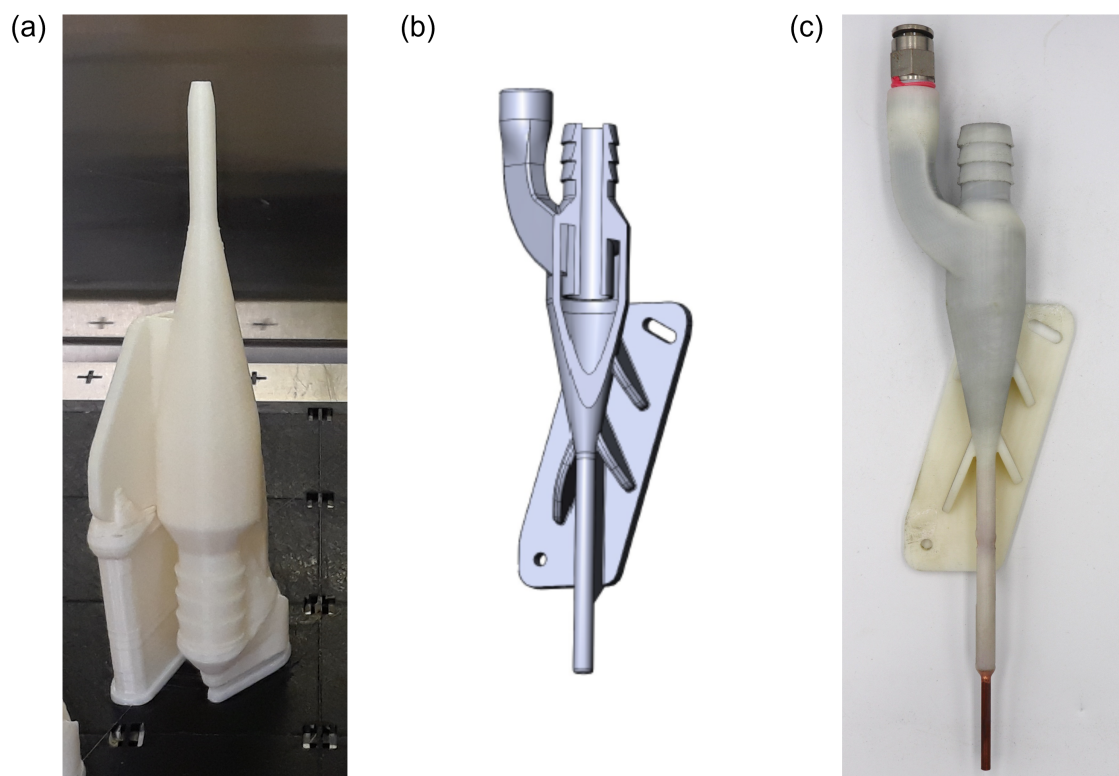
(a) Previous prototype printed in one piece with no internal supports. (b) Gas cyclone CAD with section view showing inlet area and vortex finder. (c) Printed and assembled cyclone with fitting and copper tube extension.
